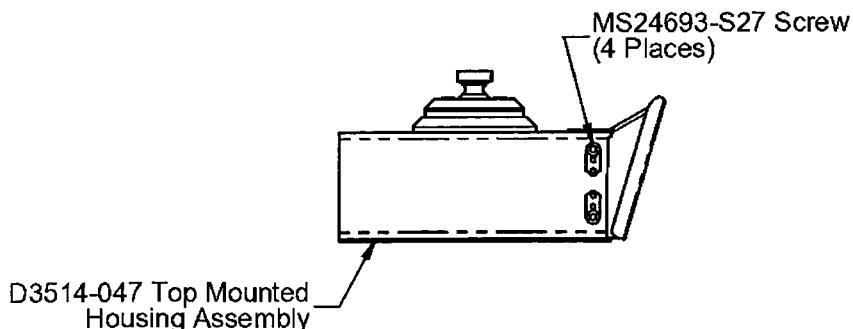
Screws for Mounting GPS Unit (Detail A from Figure 1.2)
